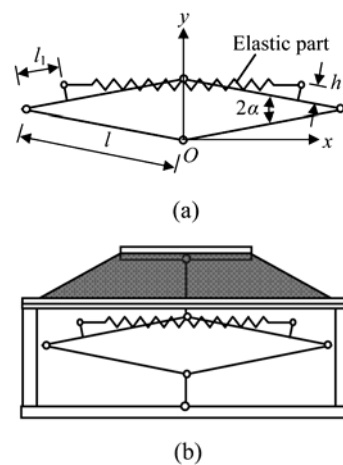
Schematic view of (a) diamond four-bar linkage mechanism and (b) assembly of mechanism
